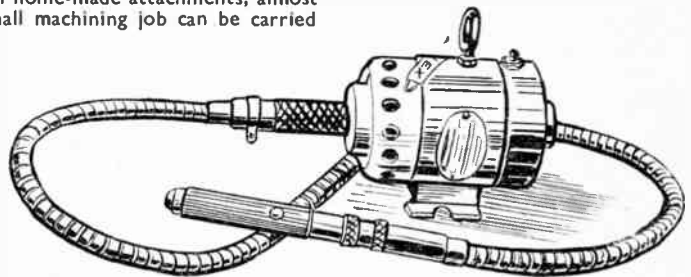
The type of machine which is ideal for model maker and home mechanic
